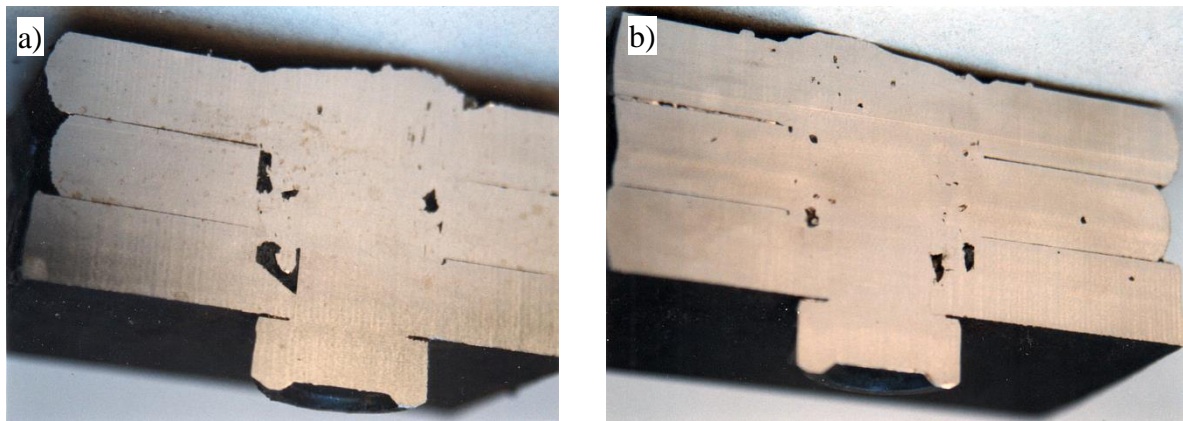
Macrography of non-etched cross sections of weld stud joints: a) type II, b) type III
